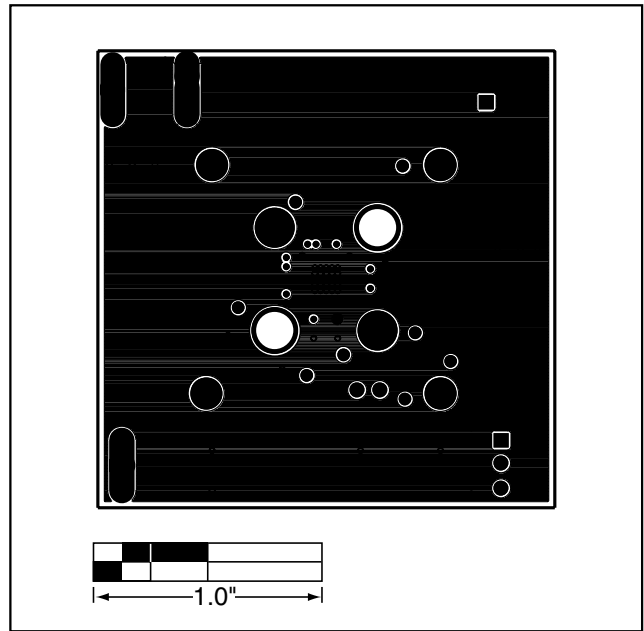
MAX3800UGJ EV Kit PC Board Layout—Ground Plane
